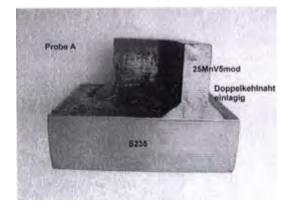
Profile of 25 MnV5mod and S235 single-layered, double-fillet welds
